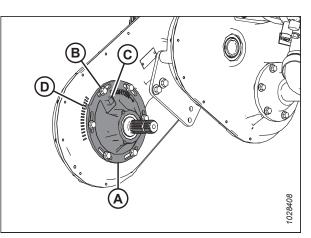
Completion Gearbox Chain Tensioner Cover
